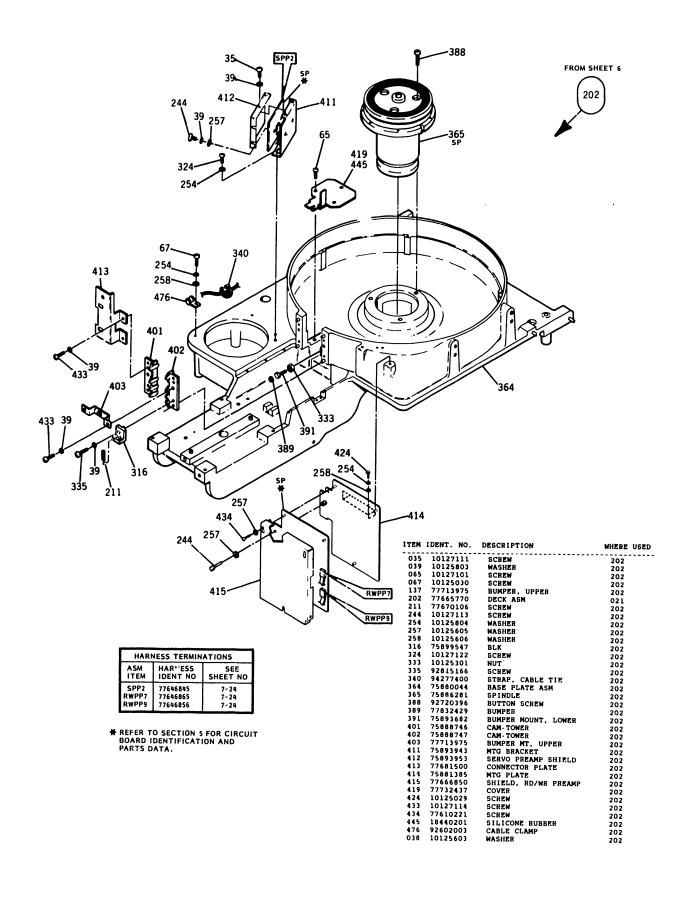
DECK ASSEMBLY (1 OF 3)
